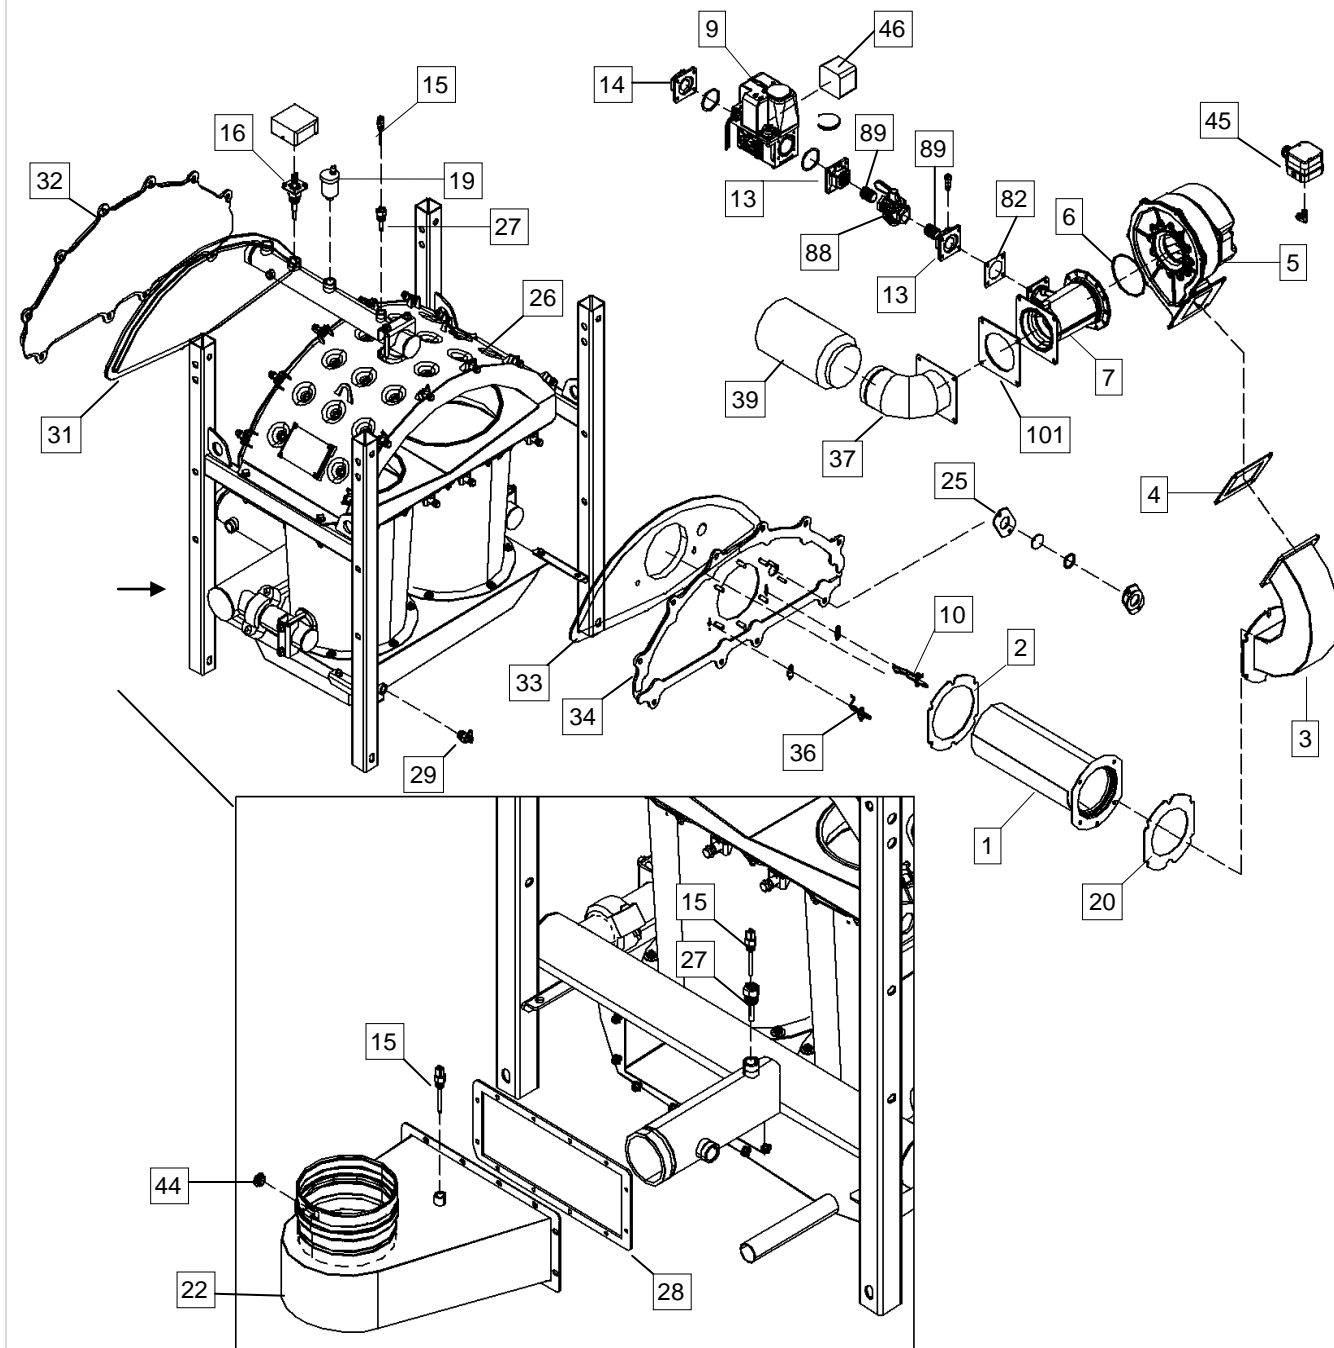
Exploded View – Heat Exchanger & Gas Train
